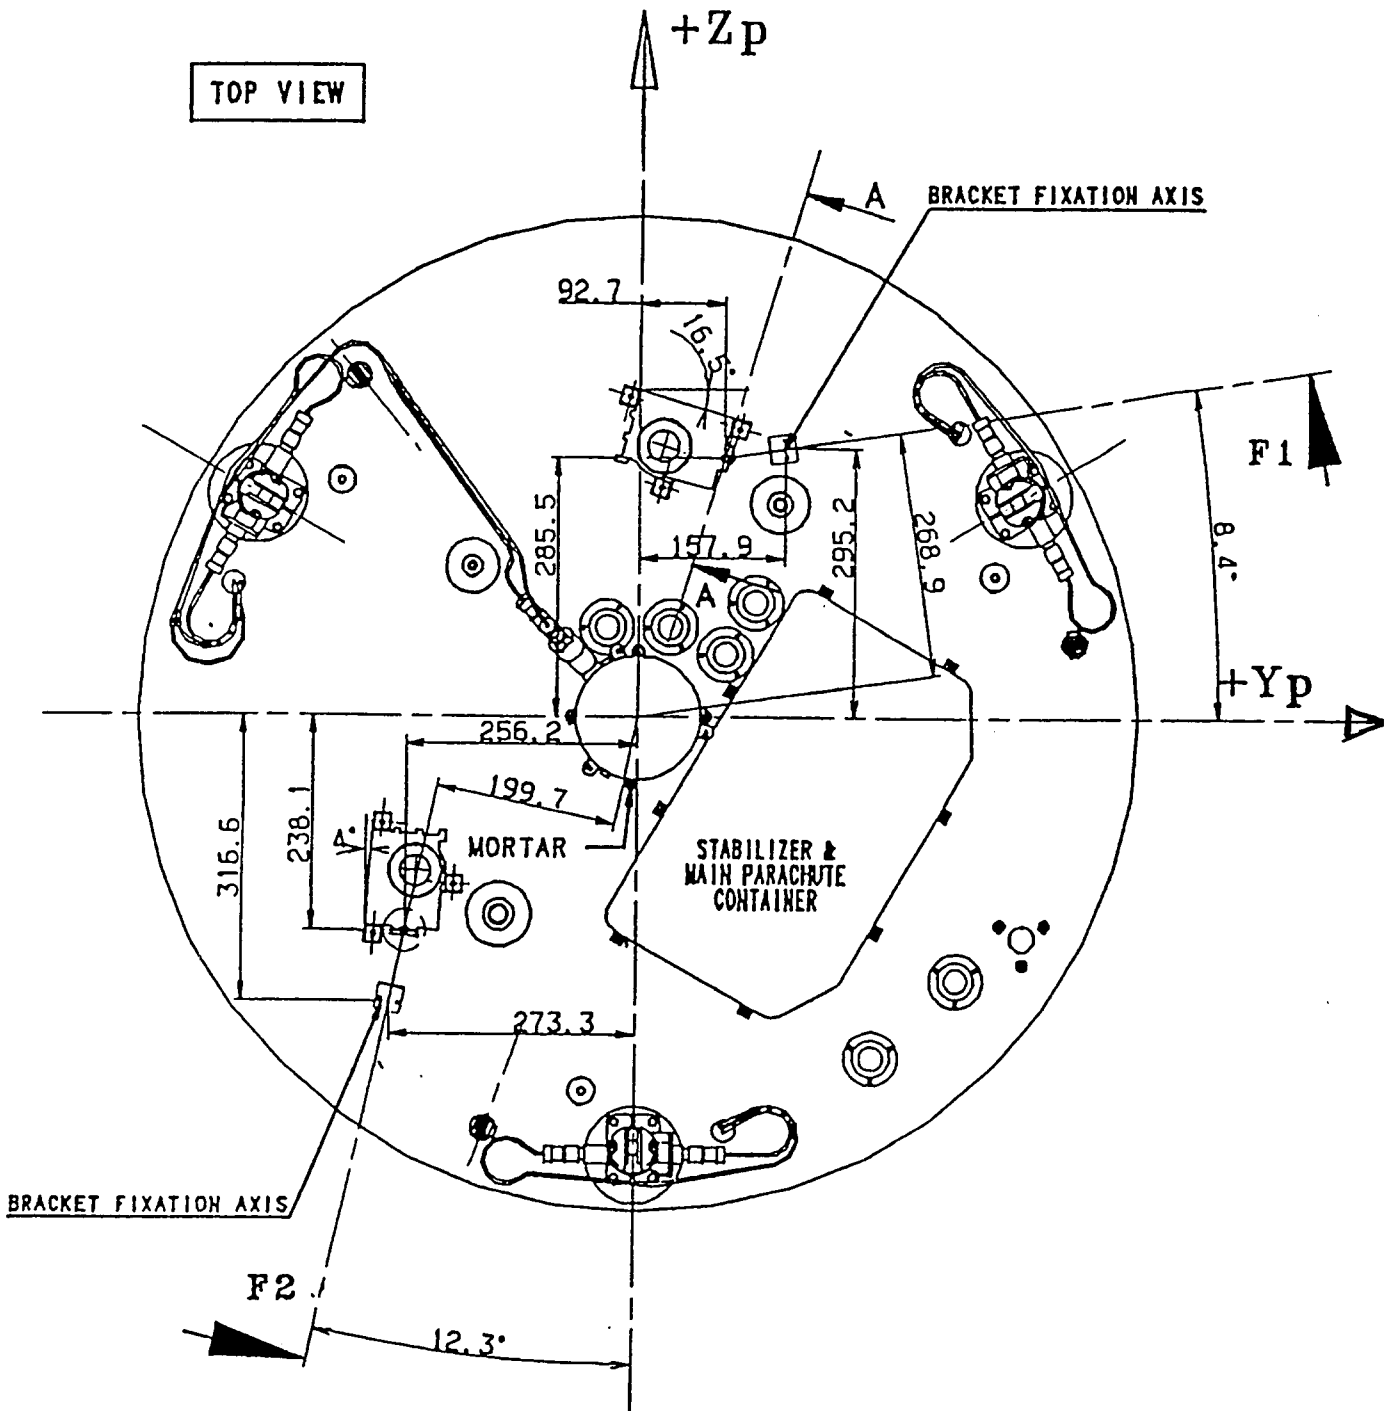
CONTAINER ASSEMBLY LOCATION
